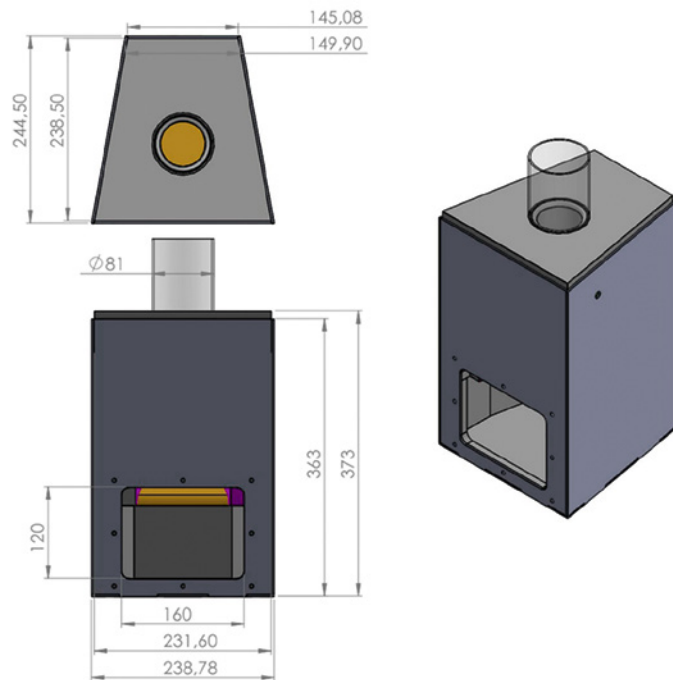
Drawing of the combustion chamber of the PHS furnace
